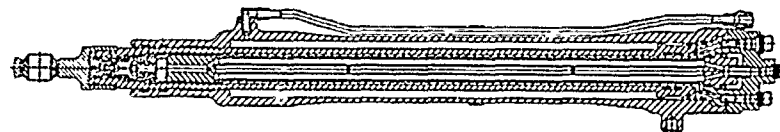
MOOG - Divergent Flap Actuator Detail Drawing
